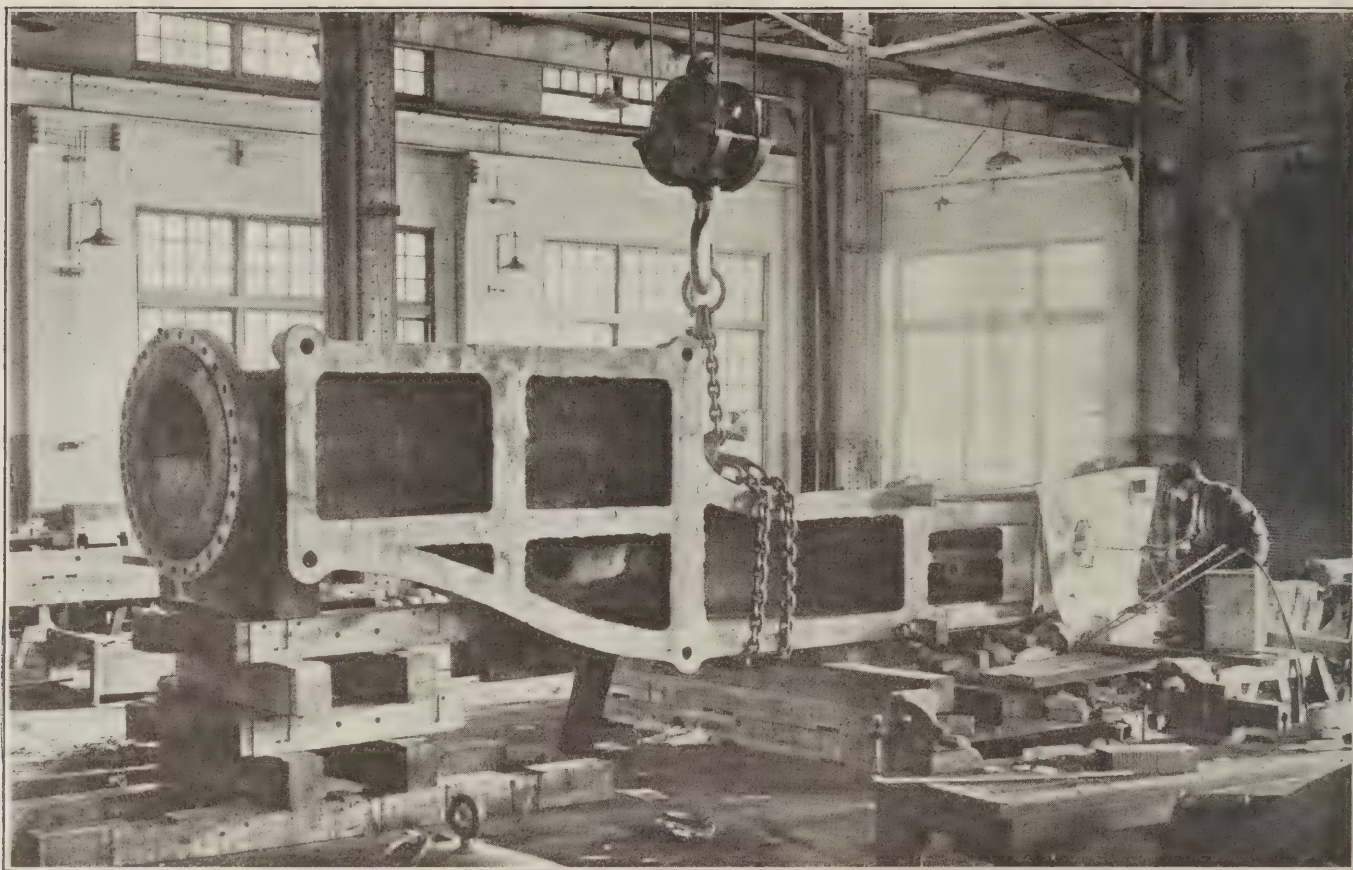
WELDING THE ENGINE FRAME IN THE SHOP
